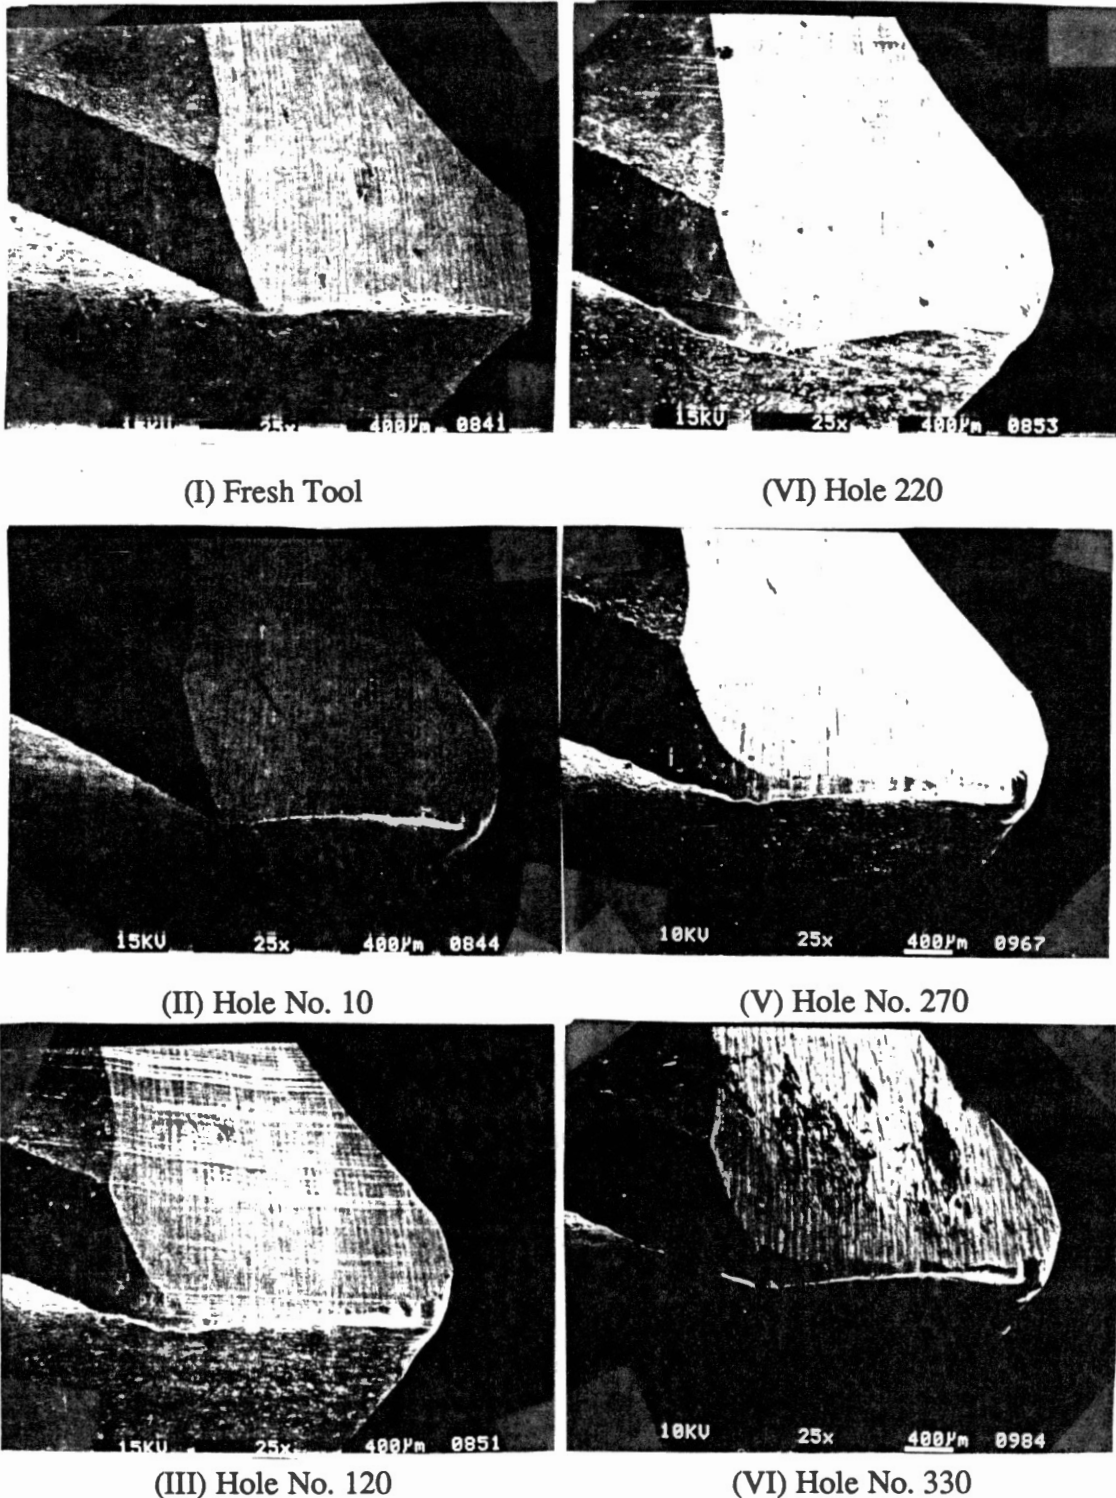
SEM Photograph at Different Stage of Wear for Side A of Drill BL. (I) Side A of Fresh Drill, (II) Side A, After Cutting 10 Holes, (III) After Cutting 120 holes, (IV) After Cutting 220 Holes, (V) After Cutting 270 Holes, (VI) After cutting 330 Holes. Drill bit 3/8 in., For normal cutting: Cutting speed: 50 ft/min (spindle speed: 500 rpm), Feed: 0.005 in./rev (2.5 in./min), Work material AISI 1045 steel (230 BHN). for high speed cutting: Cutting speed: 100 ft/min (spindle speed: 1000 rpm), Feed: 0.005 in./rev (5 in./min). Work material AISI 4150 steel (330 BHN).
